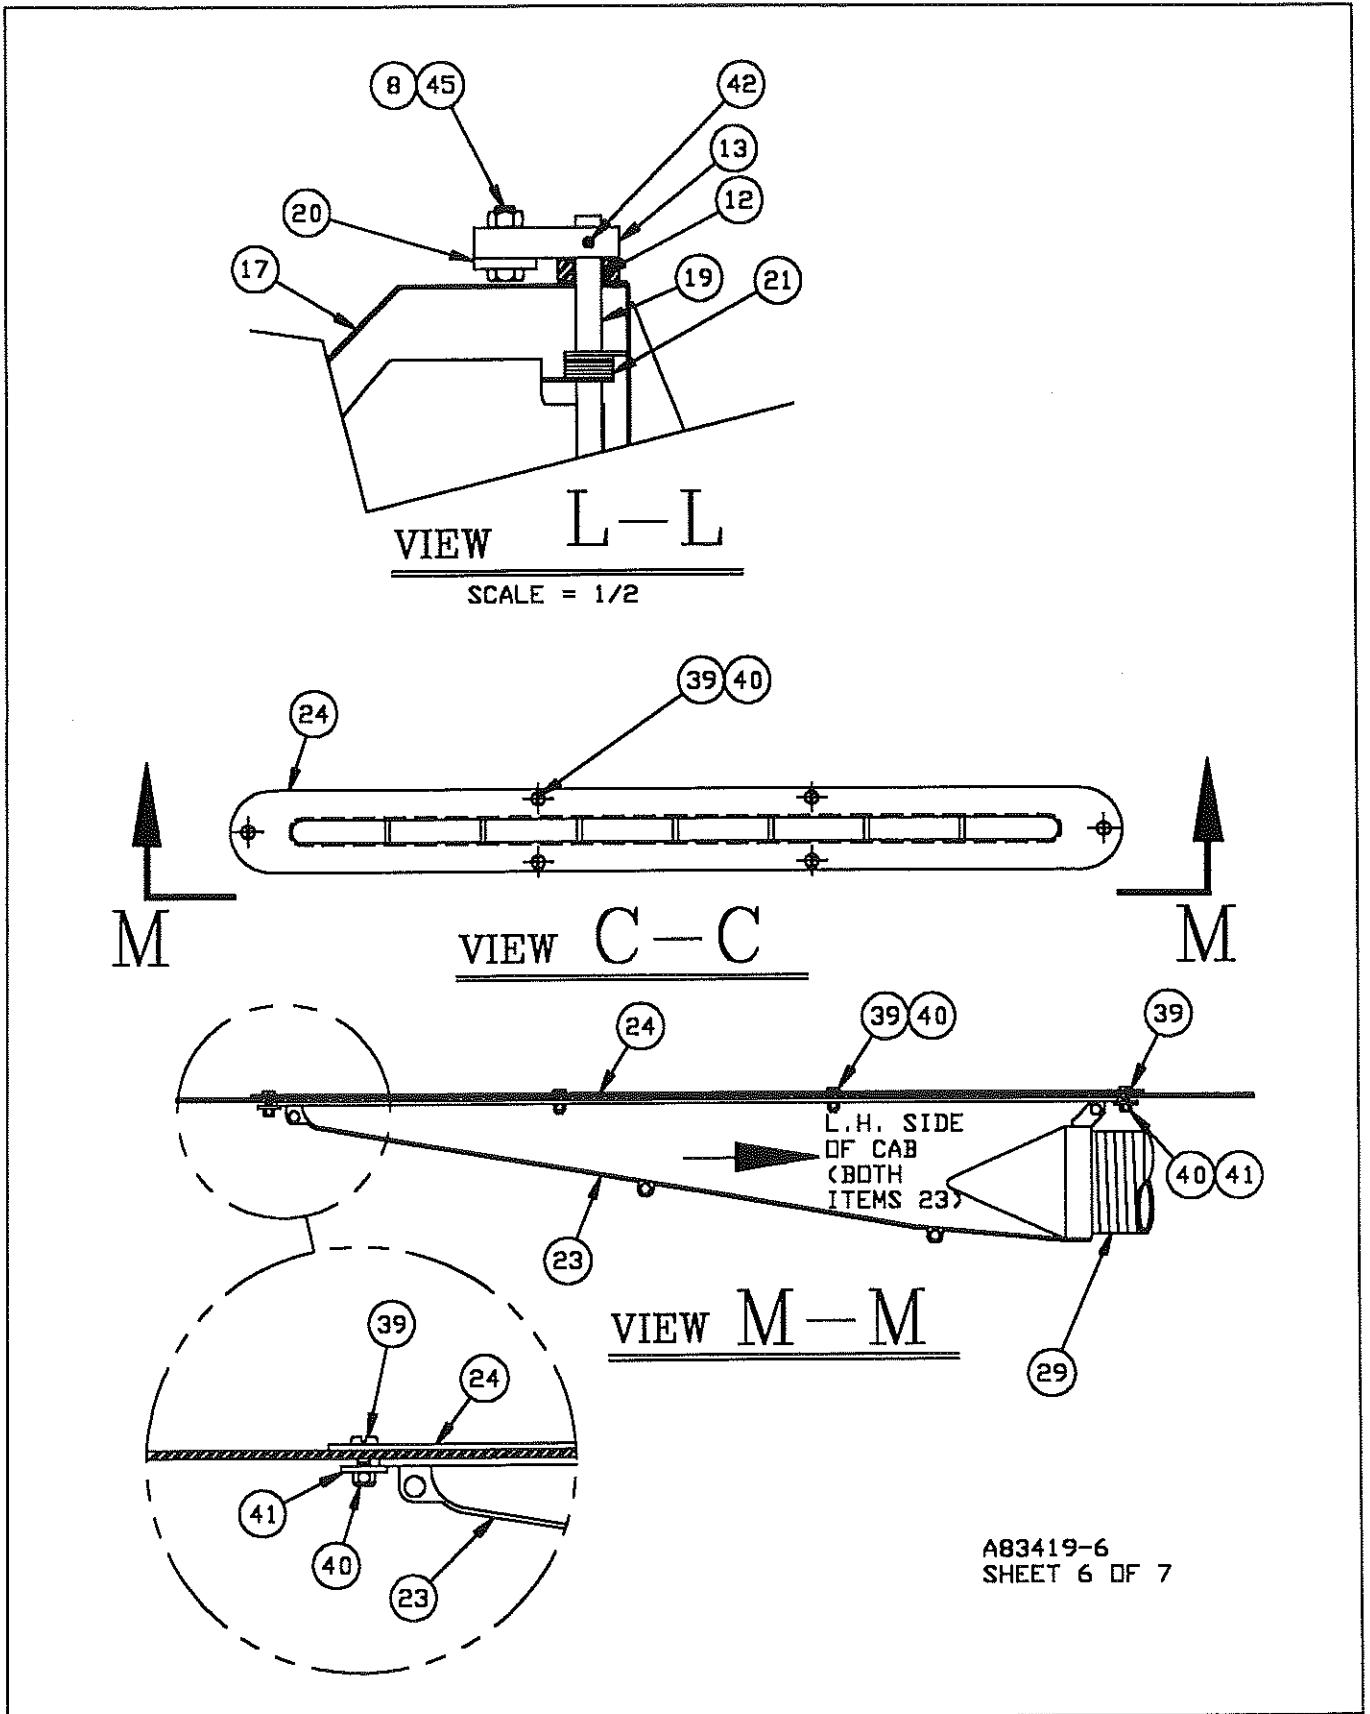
CAB HEATER ASSEMBLY - SHEET 6 OF 7
